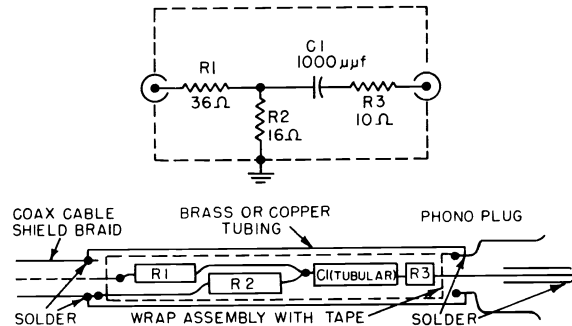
I-F INJECTION PLUG CONSTRUCTION
